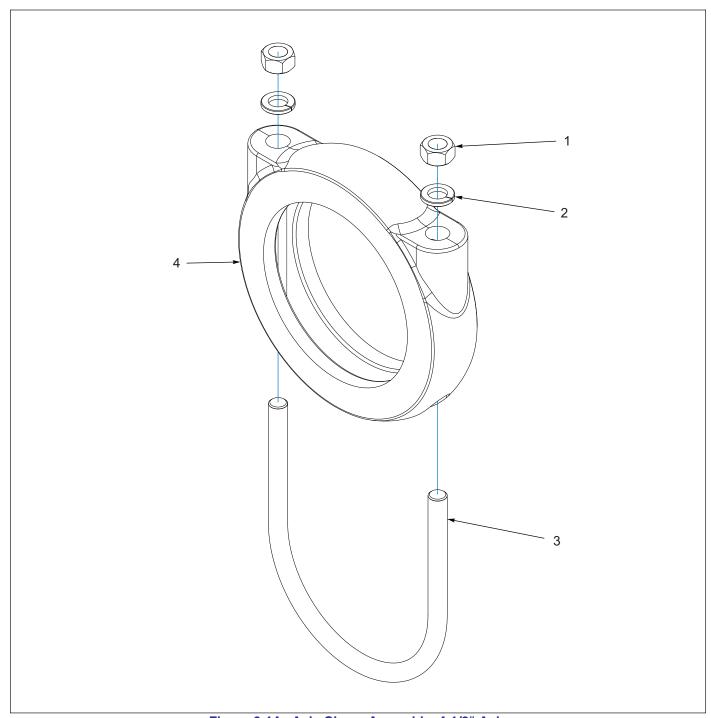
Axle Clamp Assembly, 4-1/2" Axle
